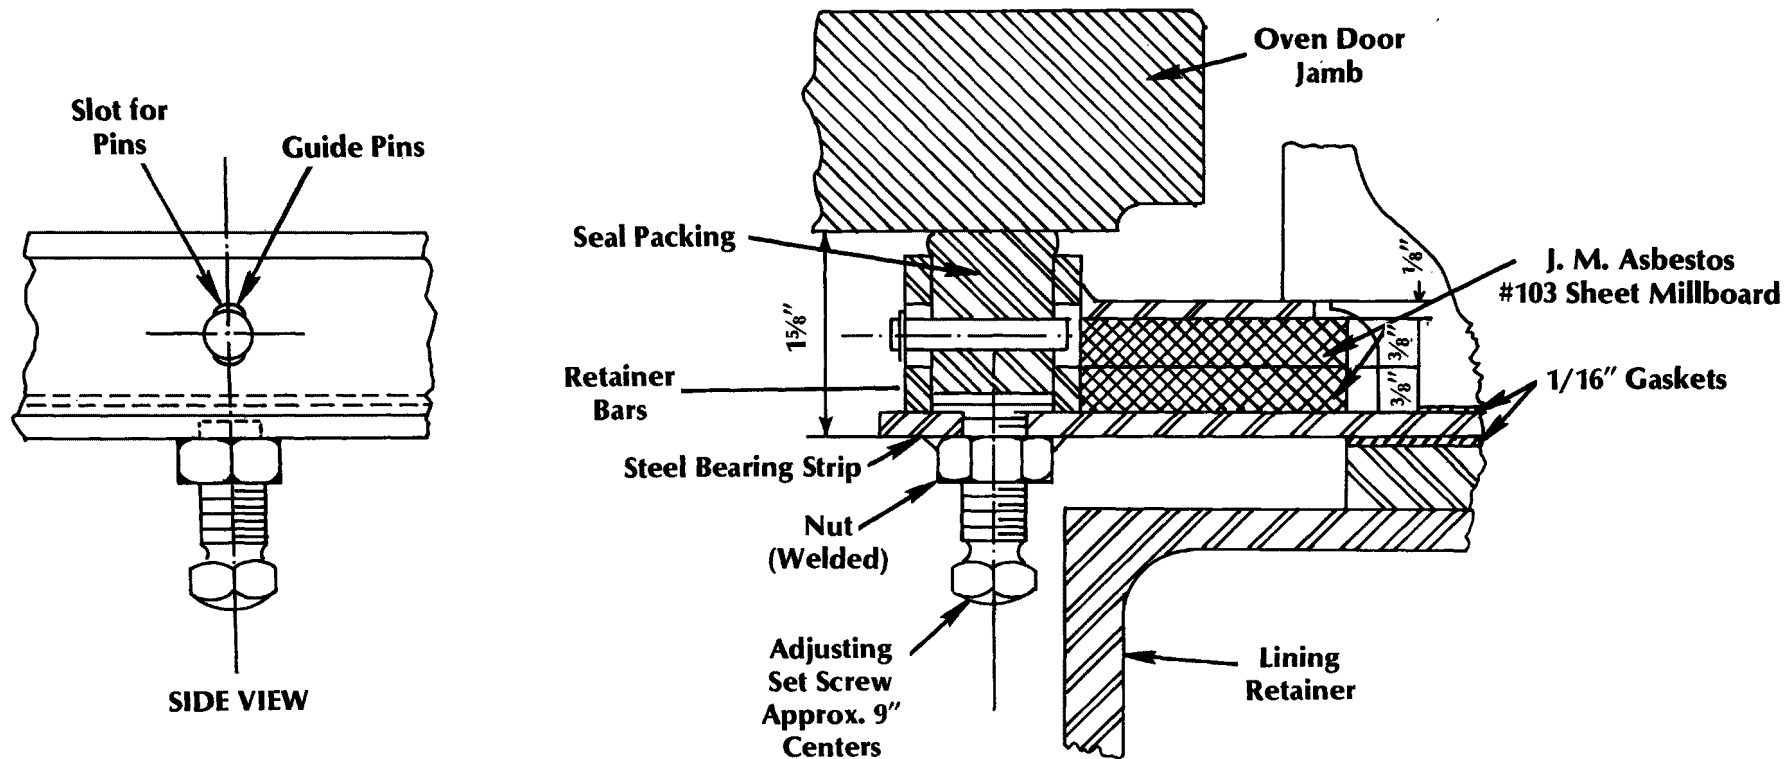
INTERLAKE INCORPORATED DRAWING OF A PROPRIETARY DOOR SEAL, I.E., A MODIFIED FIXED-EDGE SEAL
